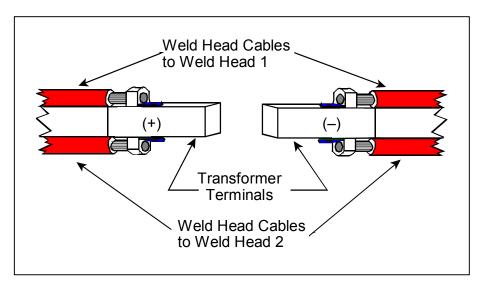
Weld Cable Installation for Dual Head Operation
